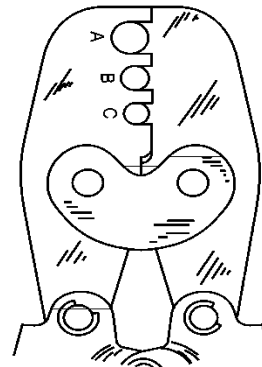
AMP 220066-1 Ferrule Crimping Tool Showing the Three Crimping Dies
